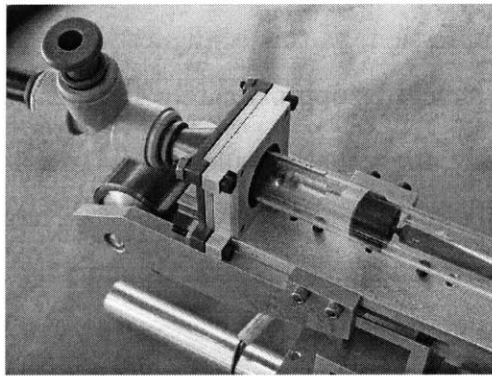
Endbell, frame, and cylinder statically-sealed assembly.
